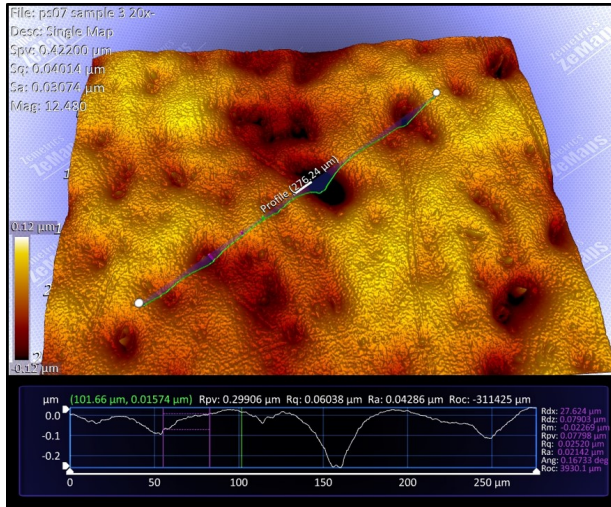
Sandpapers of 240 and 360 grit were used to roughly sand down the machined parts using DI water and isopropanol. Each piece was tossed into a tumbler with 1/2" x 9/16" ceramic cones in a 2% solution of TS compound soap to give a brushed finish. The materials were further polished with 1200 grit sandpaper and then tossed with sharper-tipped 1/2" ceramic cones to remove the orange peel effect seen on the surfaces. Finally the materials were cleaned with isopropanol and dry-polished with treated corncob to achieve a mirror finish.
